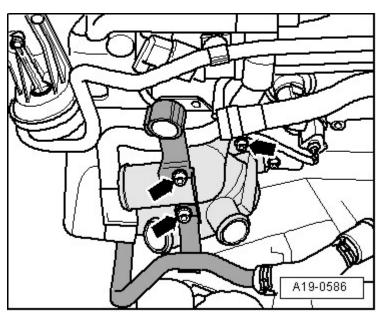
Identifying Bolts To Transmission Oil Cooler Coolant Pipe Bracket Courtesy of AUDI OF AMERICA, LLC
